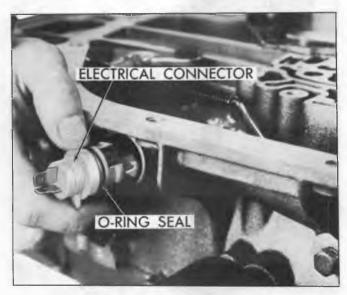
T--Removing Electrical Connector and "O" Ring Seal
